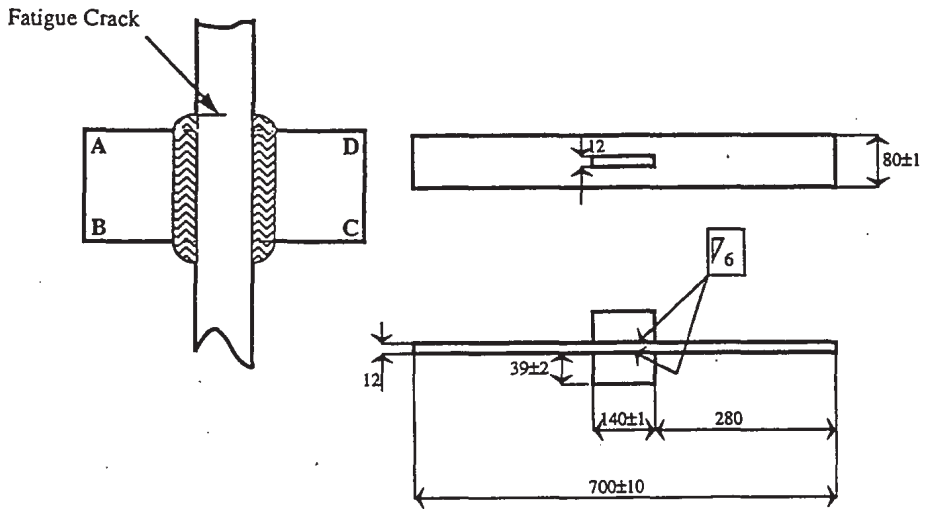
Test specimen and possible crack initiation sites. All dimensions in mm
